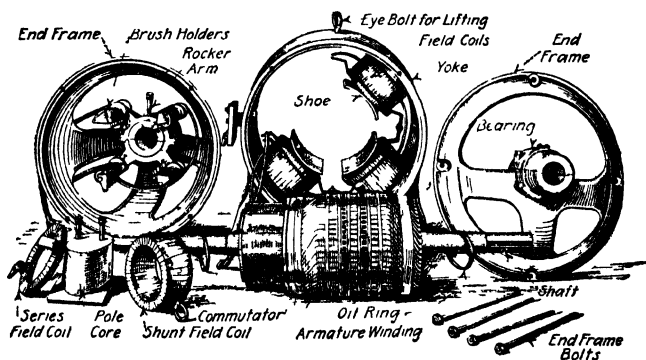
Disassembled view of the small direct-current generator shown in Fig. 307. (*Allis-Chalmers Manufacturing Company*)
